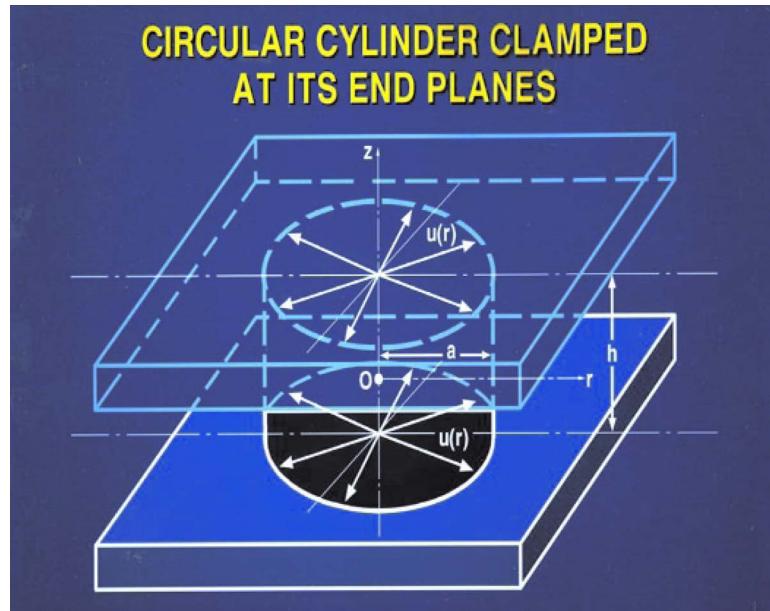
A solder joint in a thermally matched Si-on-Si assembly can be modeled as a short circular cylinder clamped at its end planes
